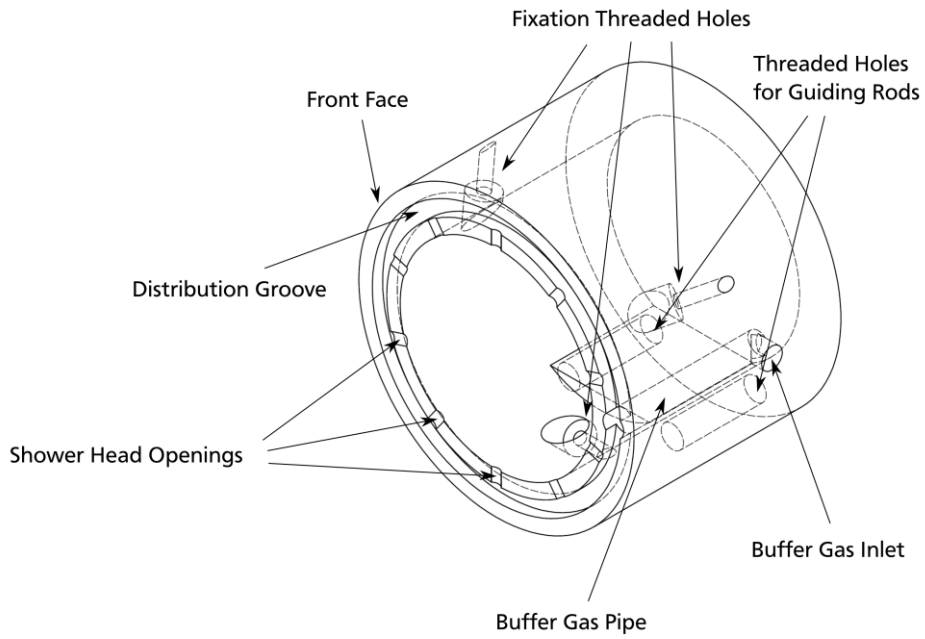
Construction Drawing of the Shower Head Part inside the AC
